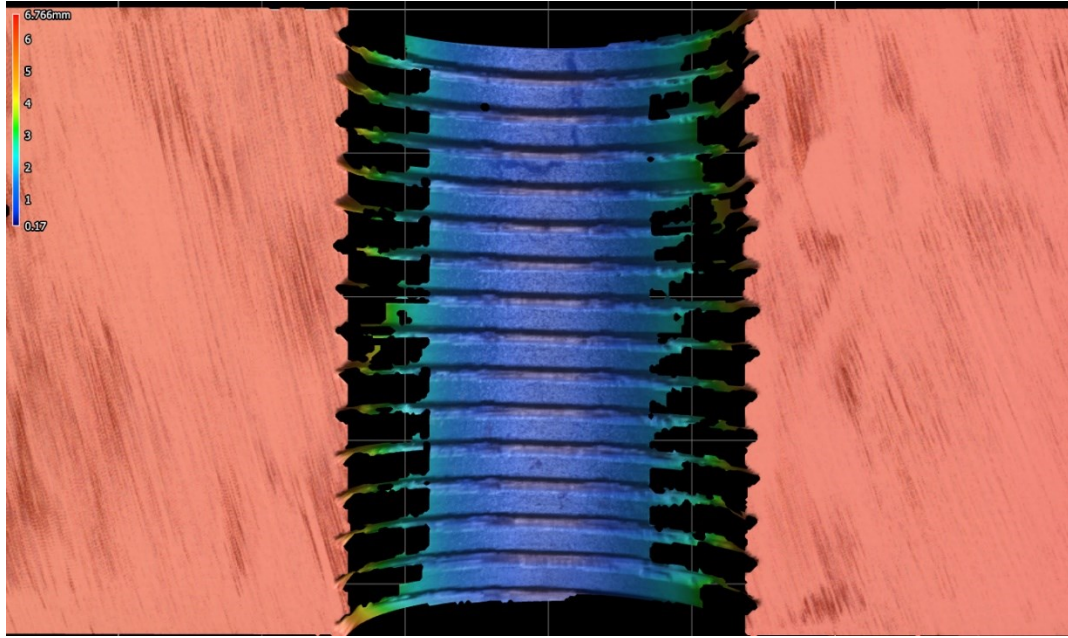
Specimen 3A hole 13 cross section 3D scan.
